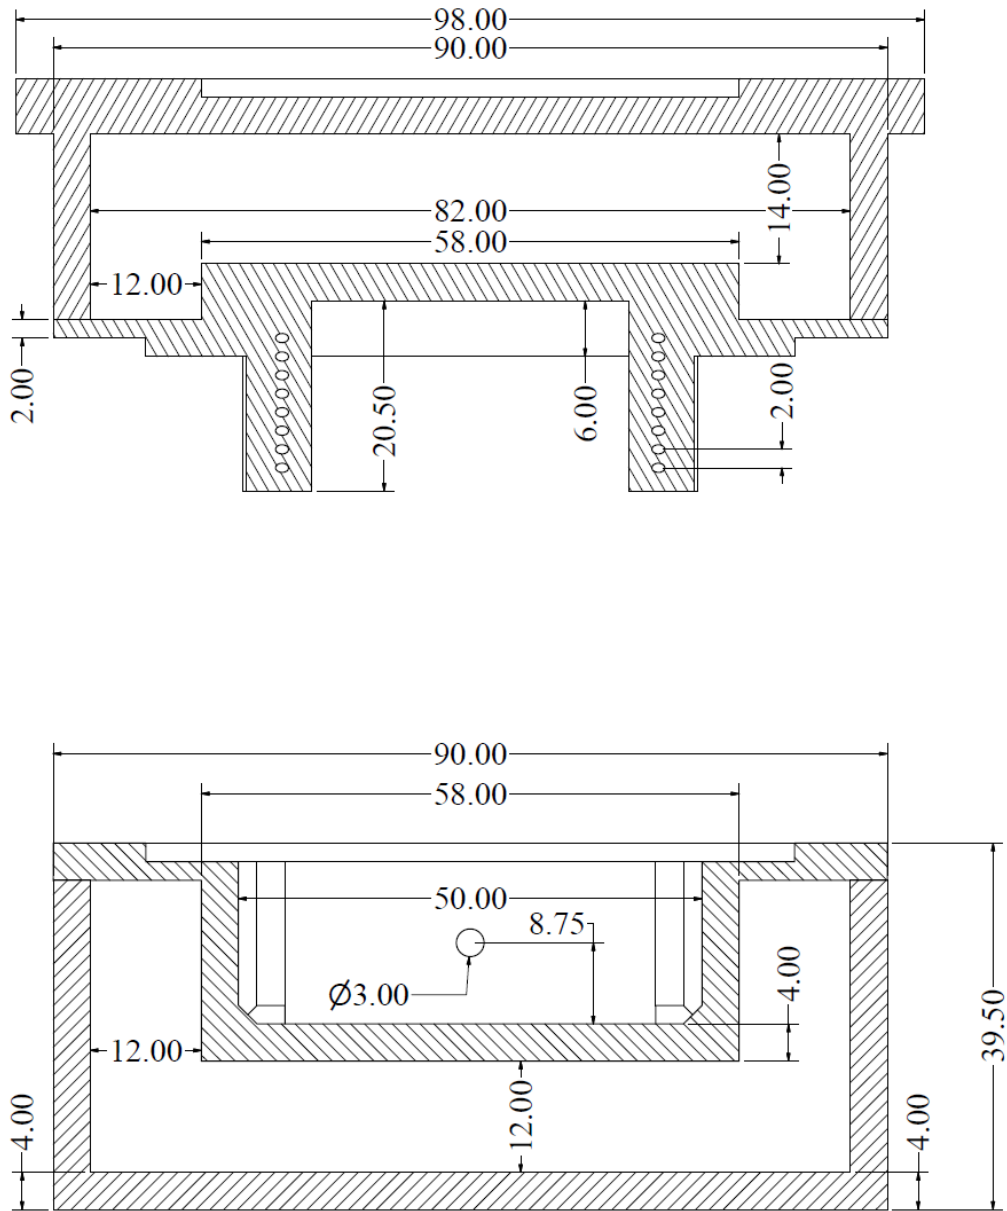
2D sectional drawing correspondent to the peloid sample holder: right view (hole (3.0 mm diameter) used for electrodes).
